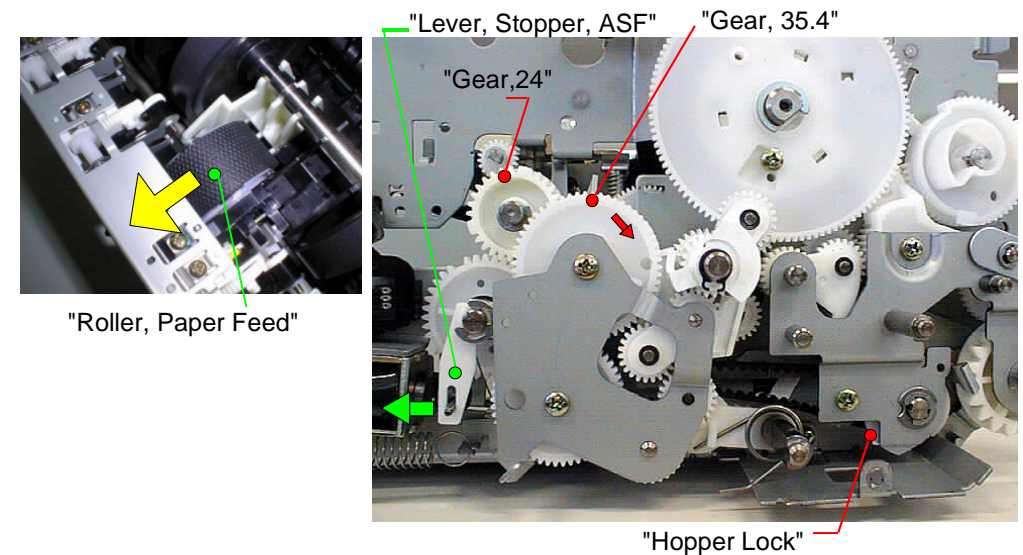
Checking Operation of "Frame Assembly, Middle, Right"
